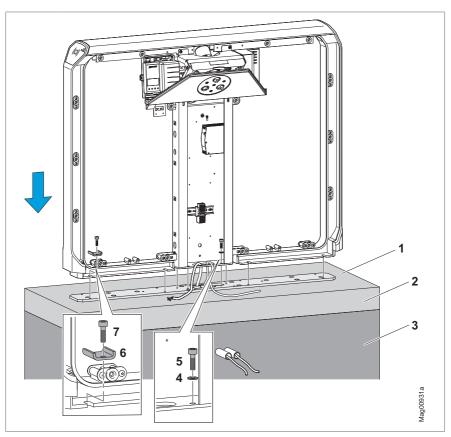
Mounting variant 3, shown here mTripod FMTP-ML
